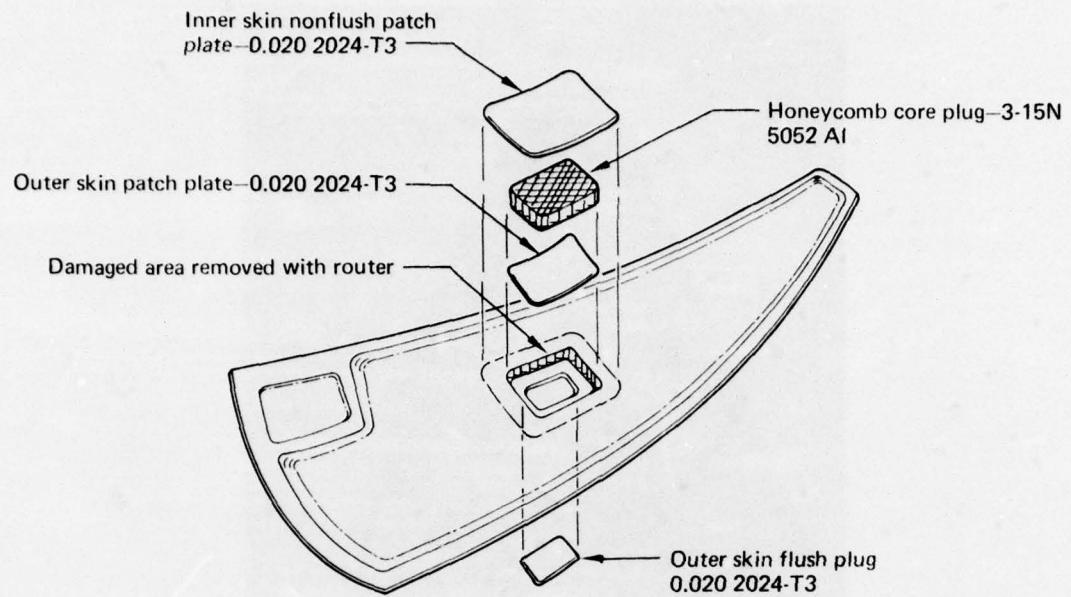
Exploded View of Repair Details for the C-141 APU Access panel
